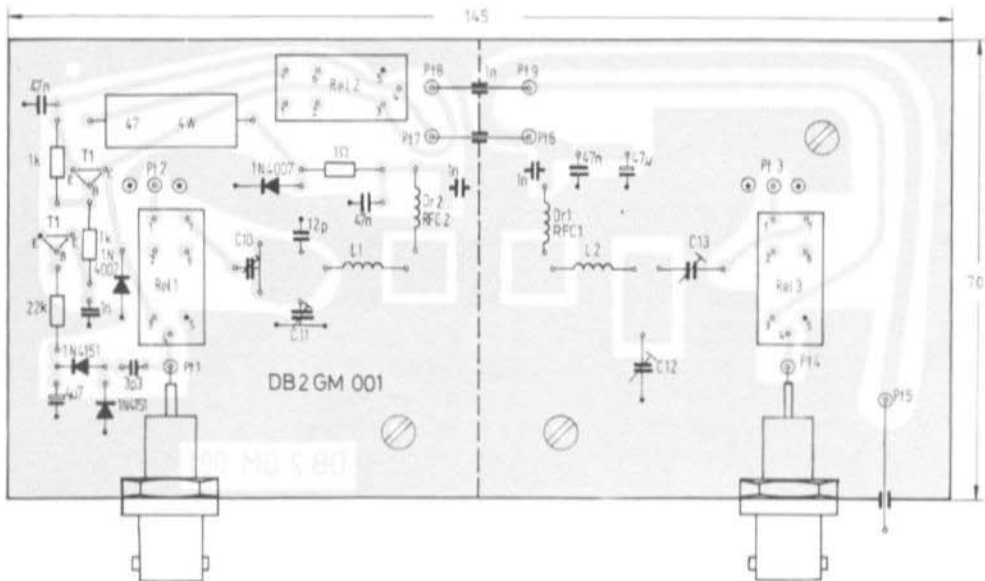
Component locations of the single-coated PC-board DB 2 GM 001
